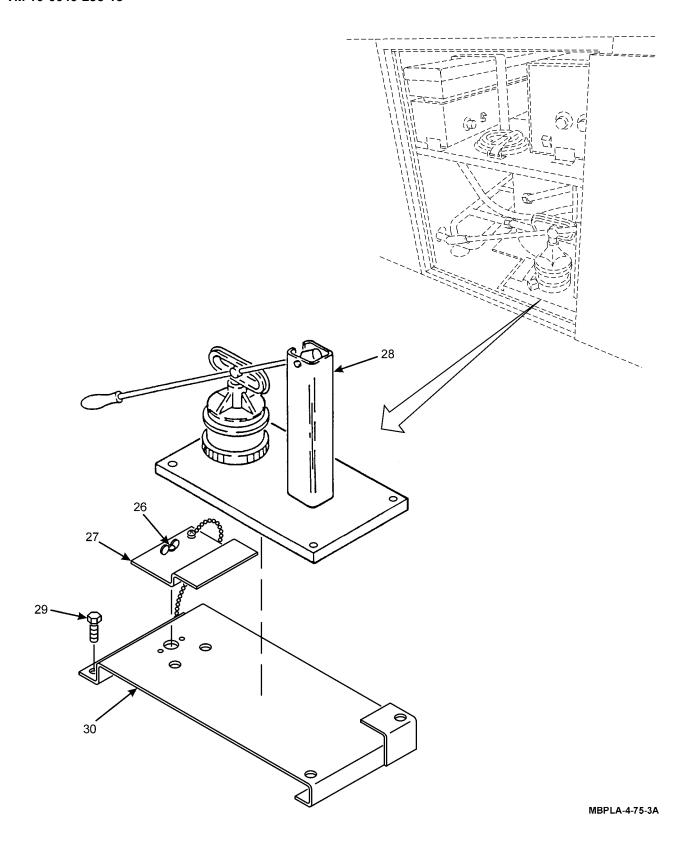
Hot Plate, Water Bath, Grease Working Machine, and Brackets (Sheet 3 of 3)
